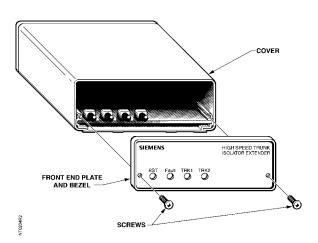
HSTIE with Front End Plate and Bezel Removed.
